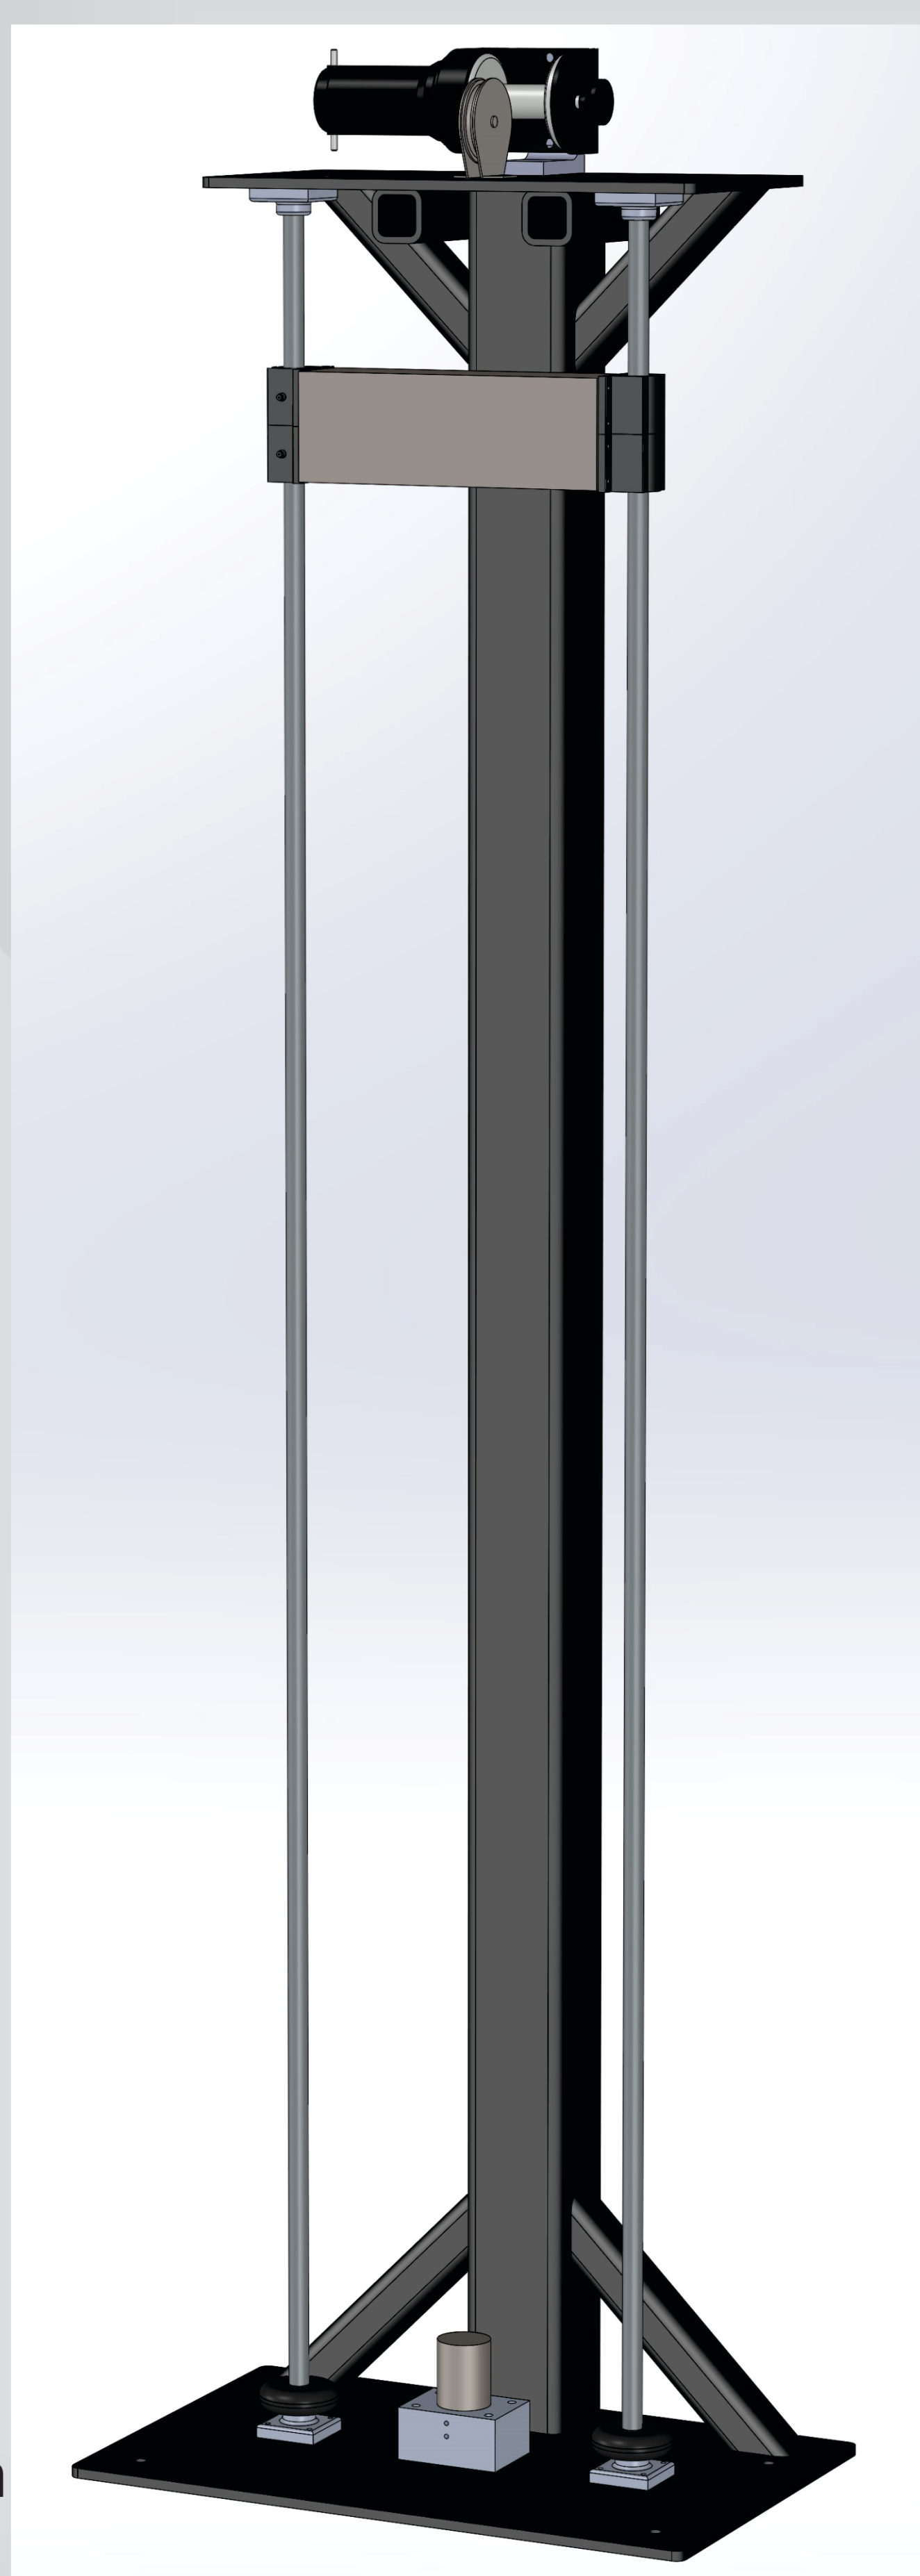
Isometric view of SolidWorks model of the drop tower impact tester.
